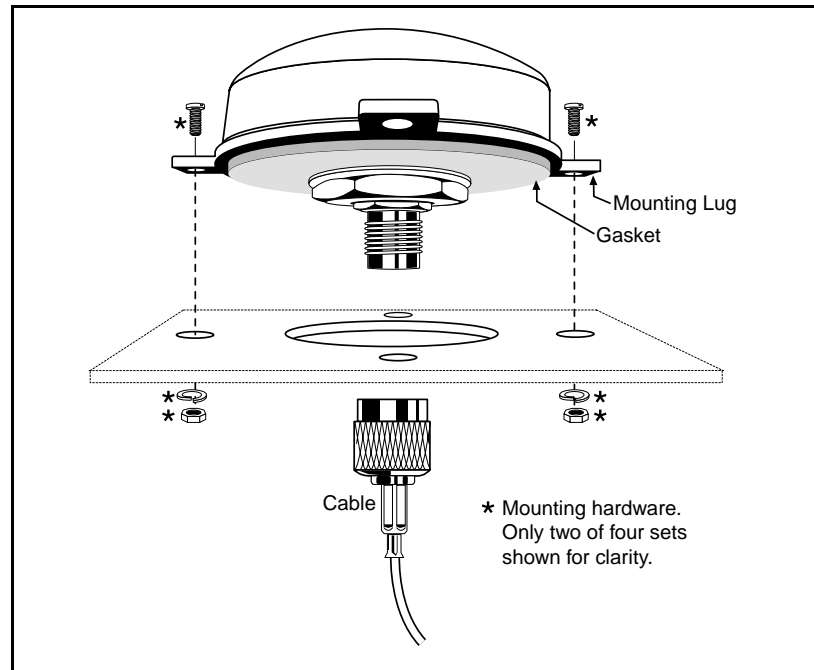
Miniature Bulkhead GPS antenna with Flange (P/N 31192-00)
